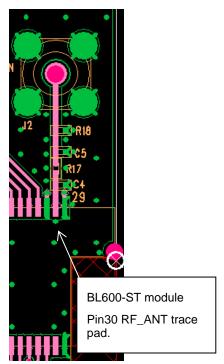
50-Ohm trace design on BL600 development board (or host PCB) for use with BL600-ST module.
